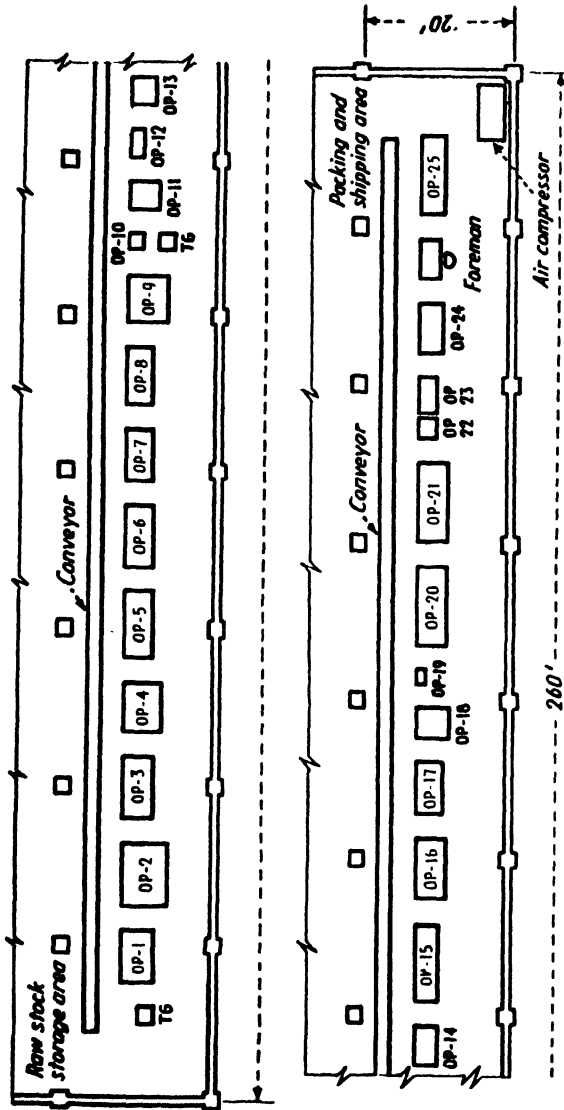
Layout of Conveyor Equipment for Shell Operations. (layout shows straight conveyor line. These set-ups will produce 342 shells per 8-hour shift—one shell every 70 seconds.)
